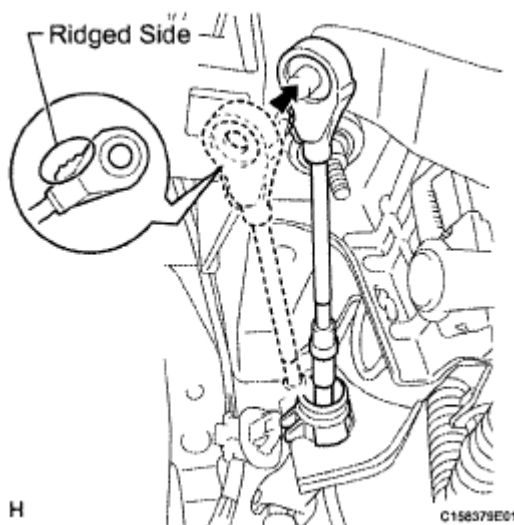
Connecting Column Shift Transmission Control Cable End To Column Shift
